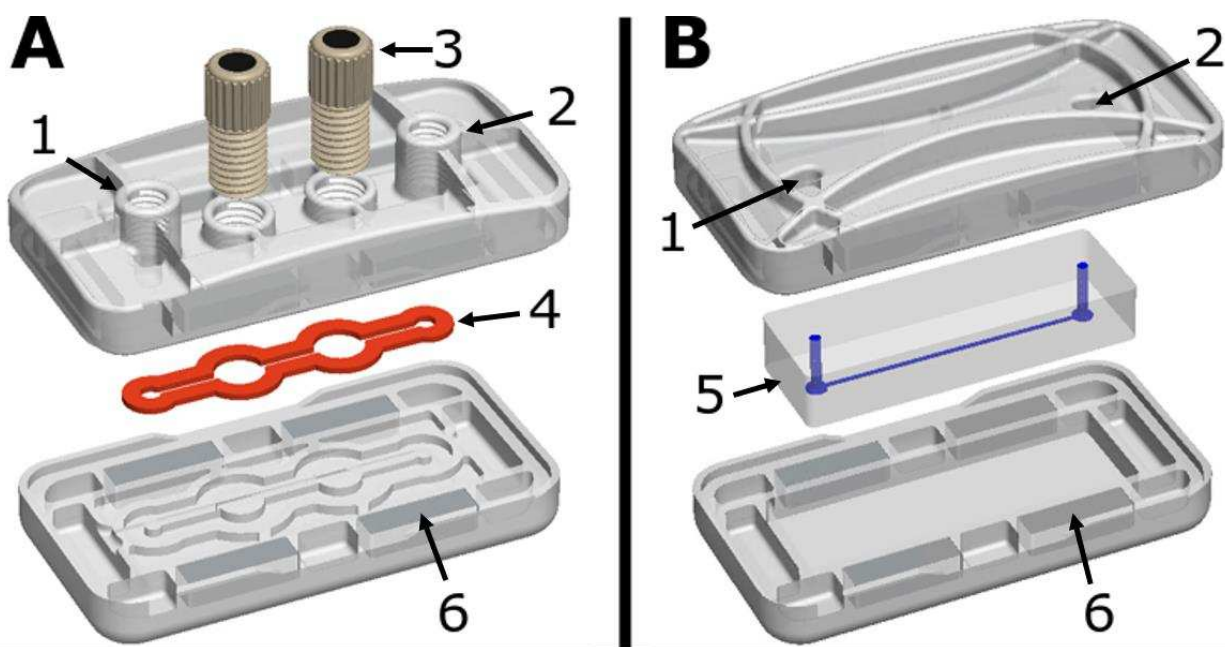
CAD drawing of the magnetically assembled sensor module. A) In design 1, the microfluidic channel is defined by a laser cut gasket. B) In design 2, the microfluidic channel is embedded in a PDMS chip. 1-6 indicate the fluid inlet, fluid outlet, electrochemical sensors, gasket, PDMS chip, and magnets, respectively.
